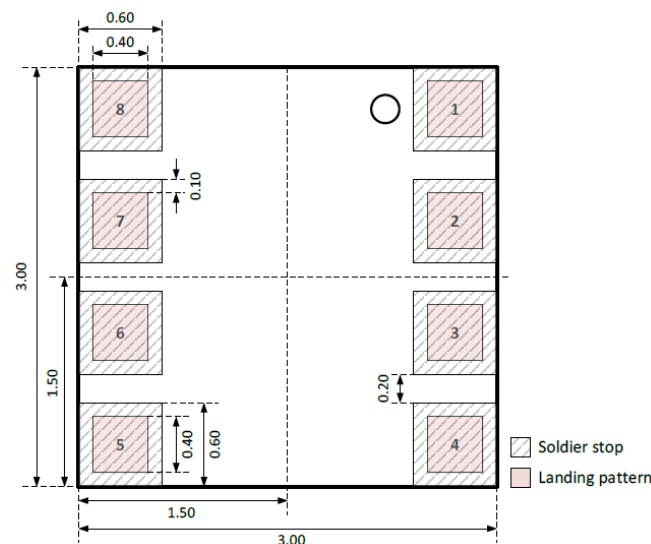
The BME680 sensor footprint (dimensions in mm) [1]
